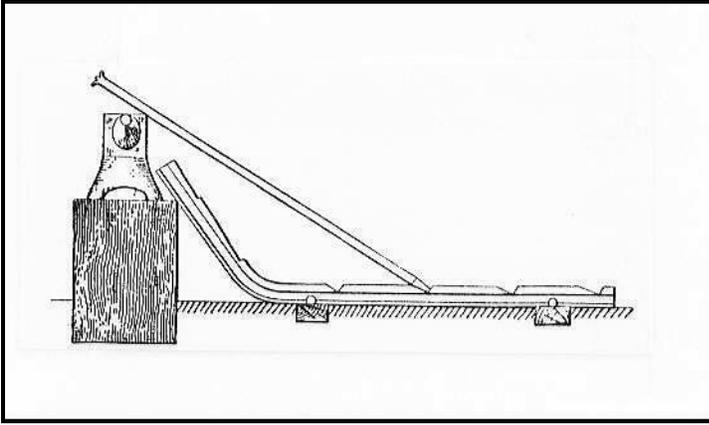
The profile illustrates a backing block, the steel bar on the floor that shop workers used to brace hot drill-steels during sharpening. The drill-steel rests in a divot in the bar, and its neck rests against an anvil on a timber stand. Backing blocks were embedded in the shop floor adjacent to the forge. Source: *Engineering & Mining Journal*, 1916:14.
